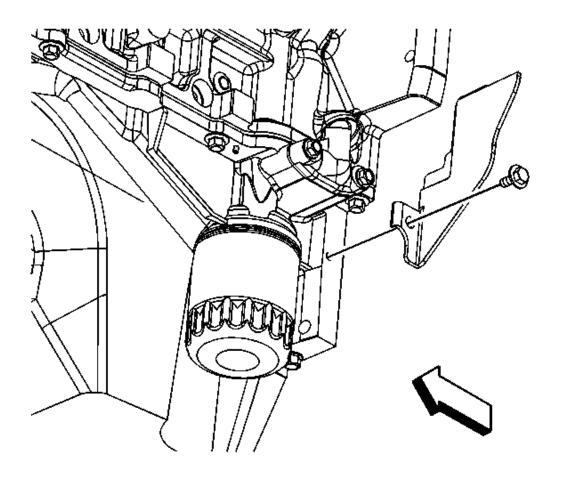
View Of Left Side Transmission Cover Bolt Courtesy of GENERAL MOTORS CORP.
